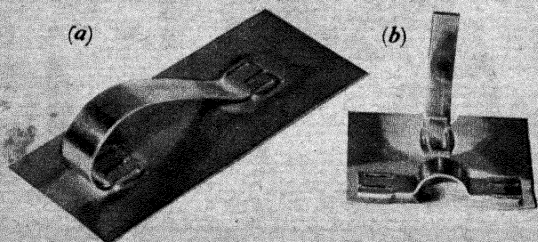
Specimen applications of cold pressure welding of aluminium. (a) handle fixed to plate, (b) strip joints fixed to plate.
